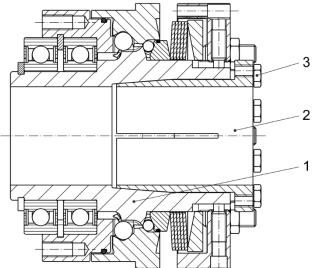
Type 4190._24_ Design with hub with cone bushing
